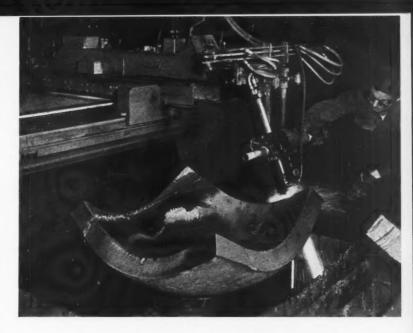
Stainless-steel plates, 38 inches square by 3 11/16 inches thick, were heated and pressed to shape, and then trimmed and beveled in one operation by means of the flame-cutting set-up illustrated
